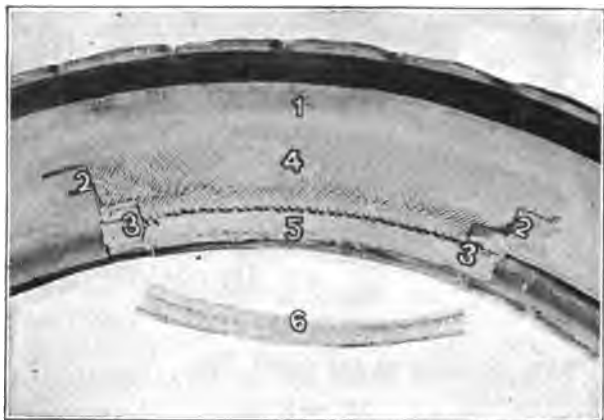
Cutting new bead section. 1—side wall. 2—bead covers. 3—bead. 4—split bead removed. 5—staples.
